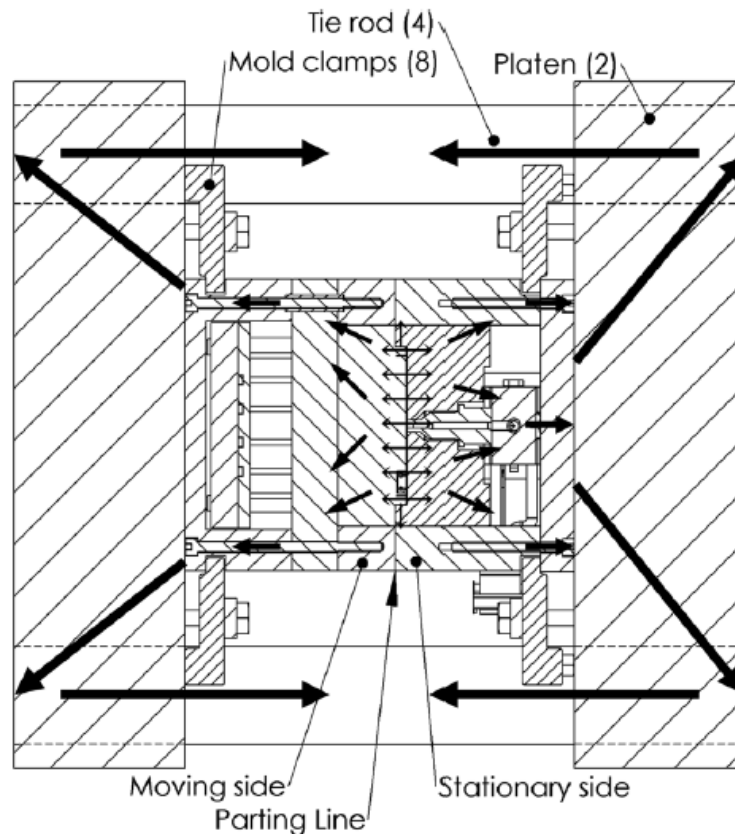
Stress pathways in mold and molding machine during the injection molding cycle [3]
